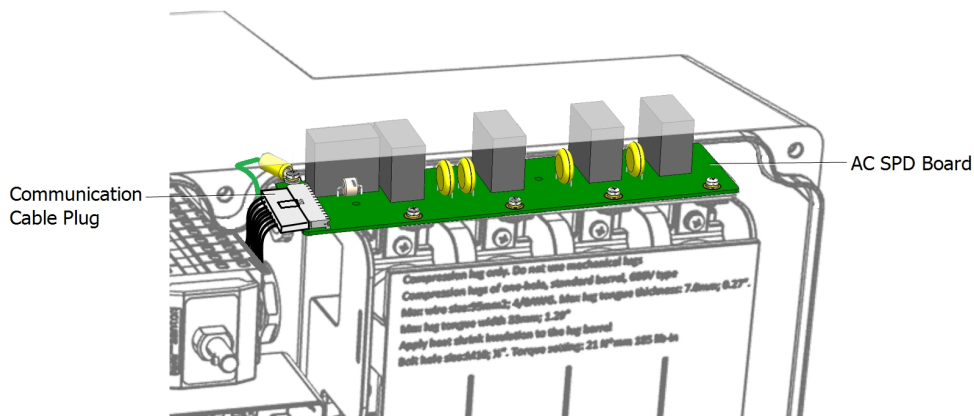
Disconnecting the Plug of the Communication Cable of AC SPD Board
